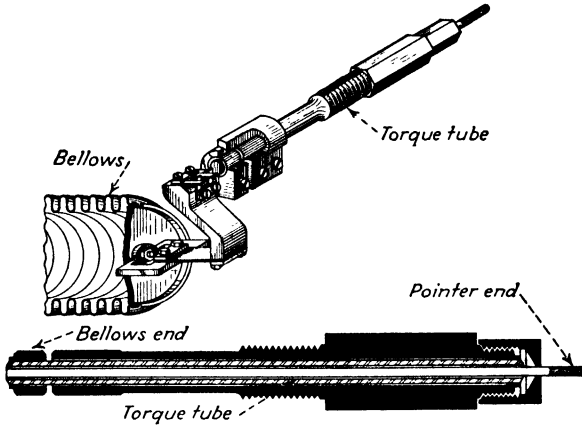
Torque tube uses a shaft and two sleeves to provide a pressure-tight seal.
